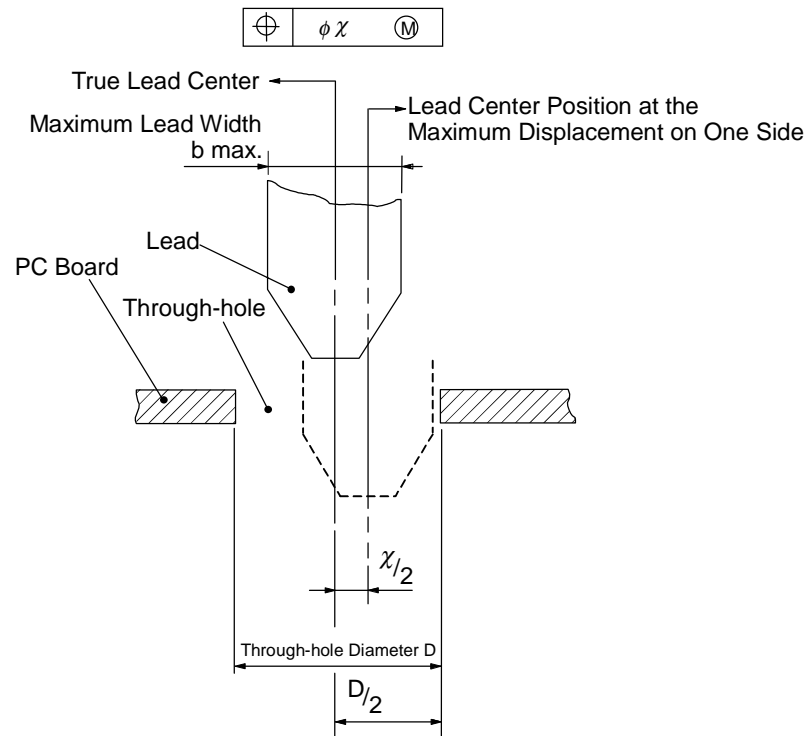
Allowable Lead Position of Through-hole Mounting Type Package
